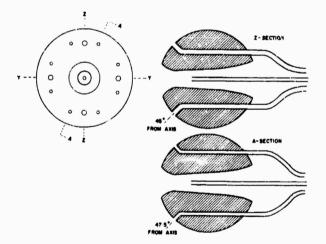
Front and cross-section views of anemoclinometer head, y- and z-coordinates shown on front view.
